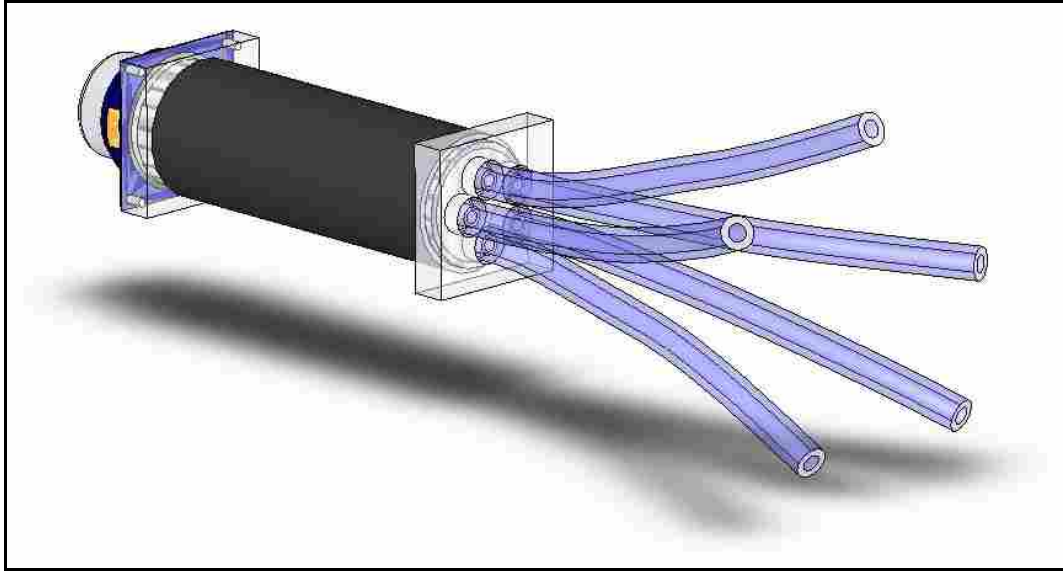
CAD assembly model with the receiver tubes connected to the splitter
